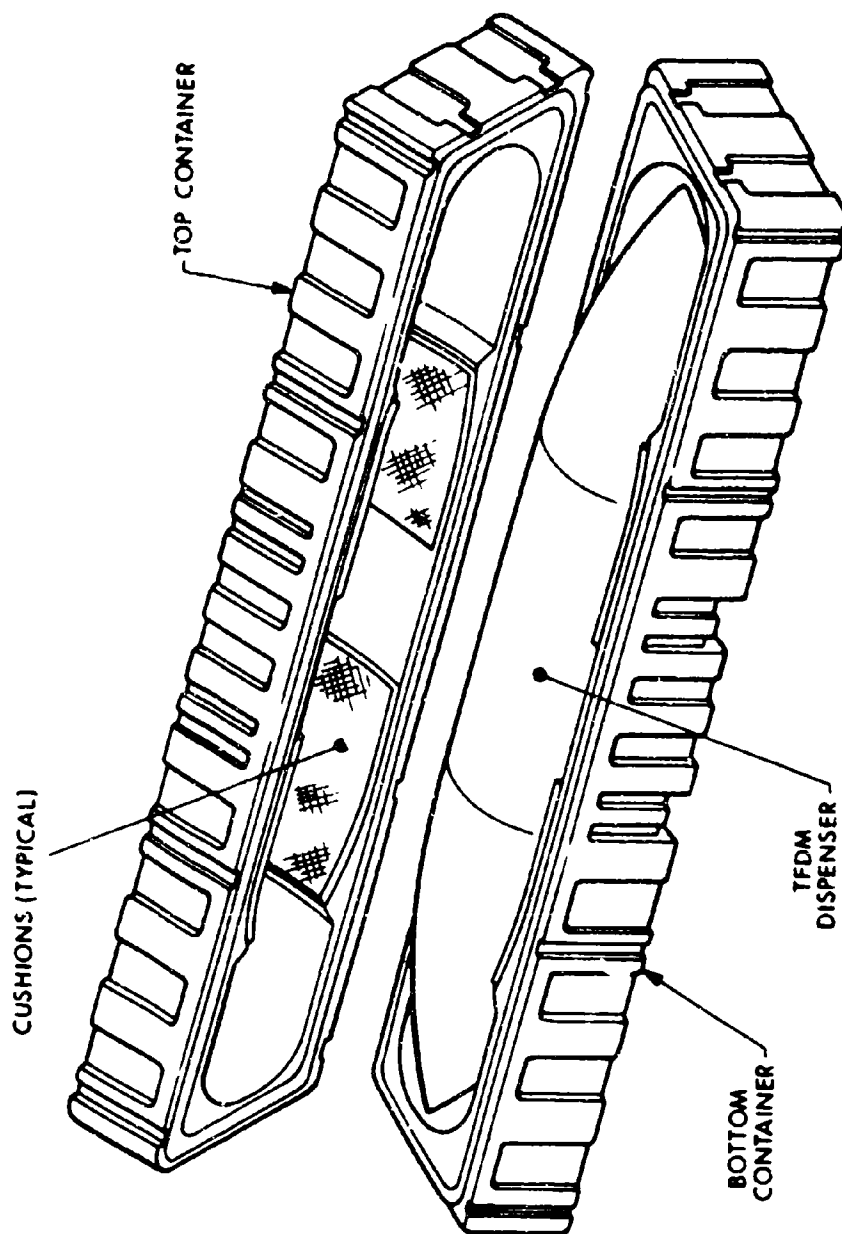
Exploded Schematic View of the CNU-104/E Shipping Container
